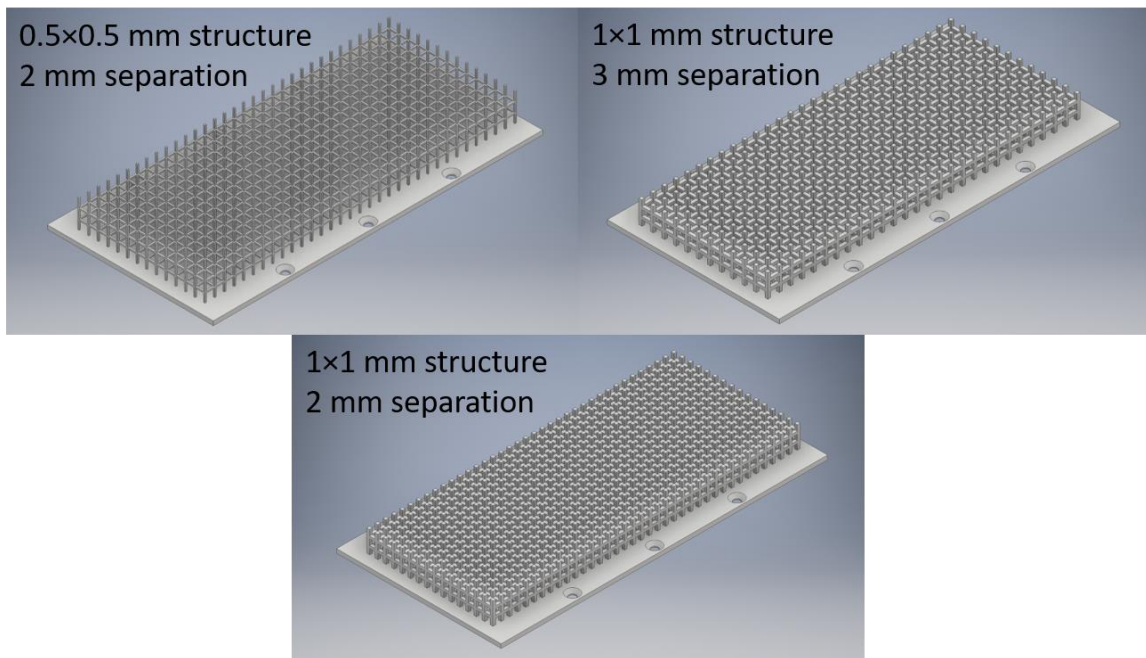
Designs for 3 ordered foam geometries machined onto base plates for testing in SLiDE with the modified base module.
